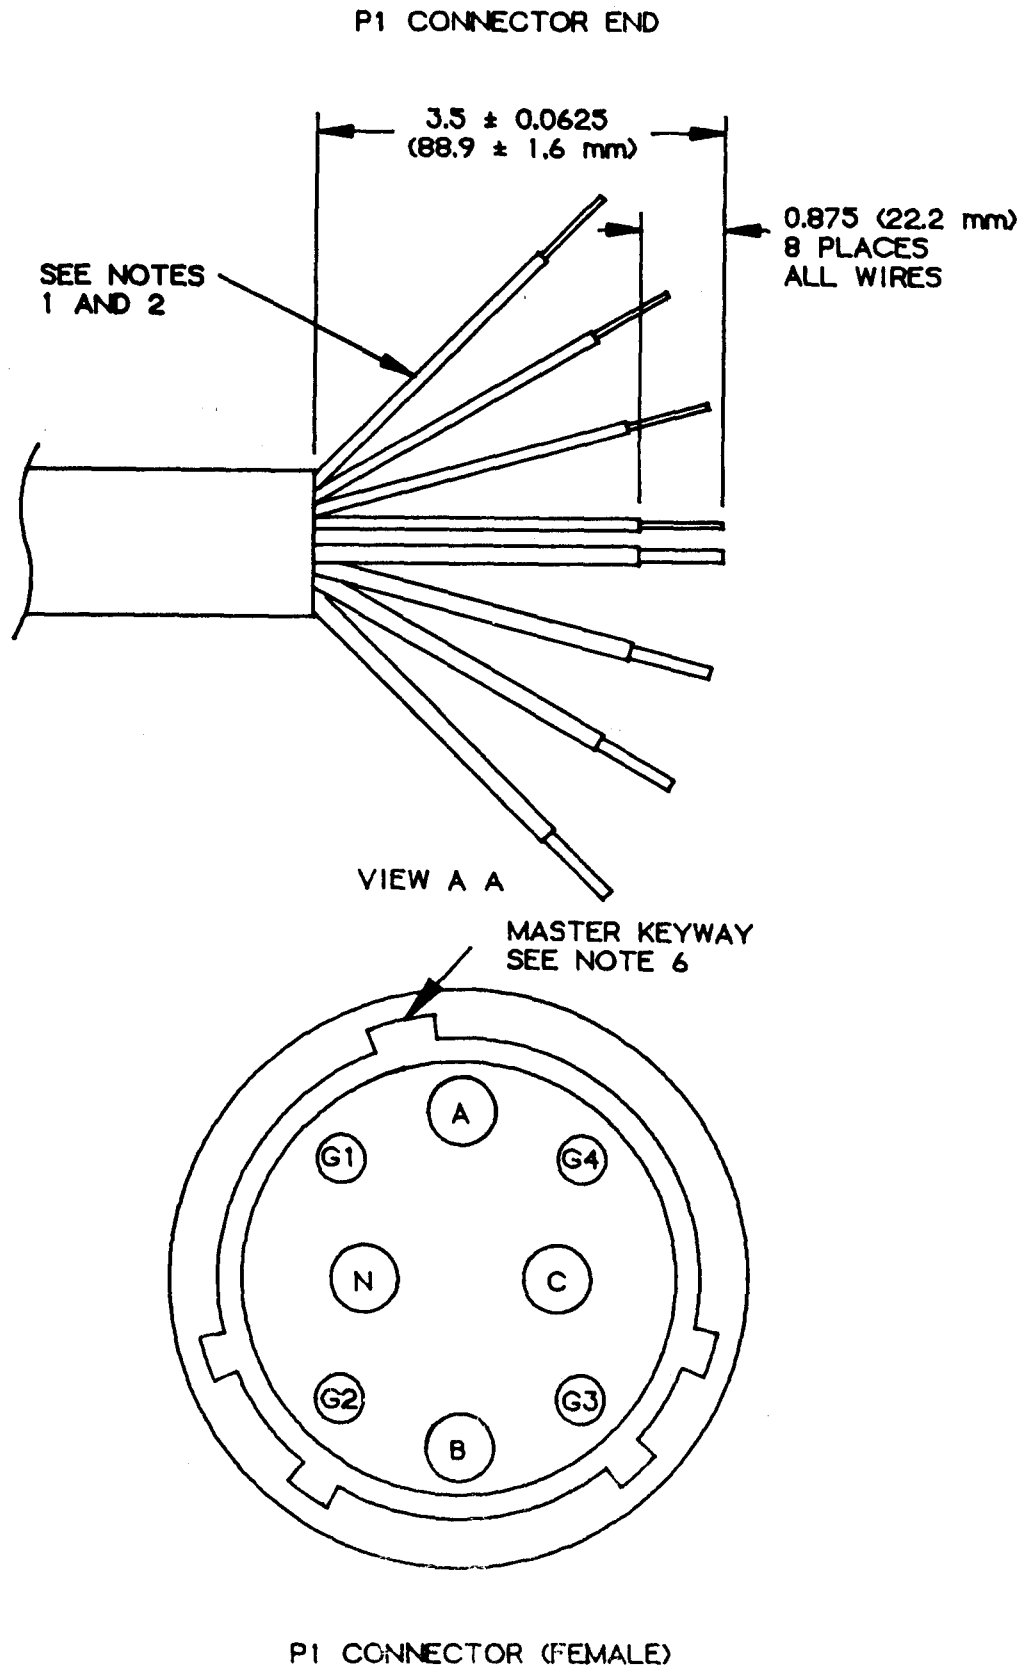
100-amp, 4-ft (1.2m) pigtail cable. (sheet 2 of 3)
